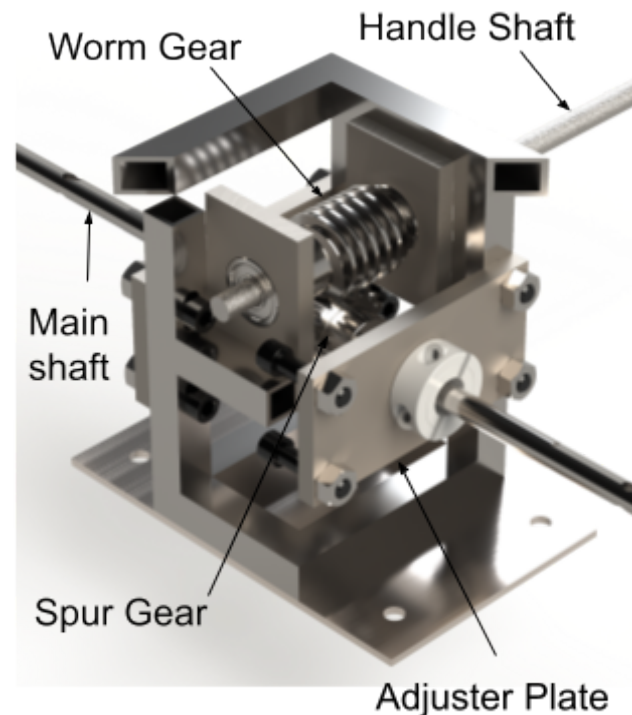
Detail view of final gearbox. Parts of frame hidden to reveal internals.
